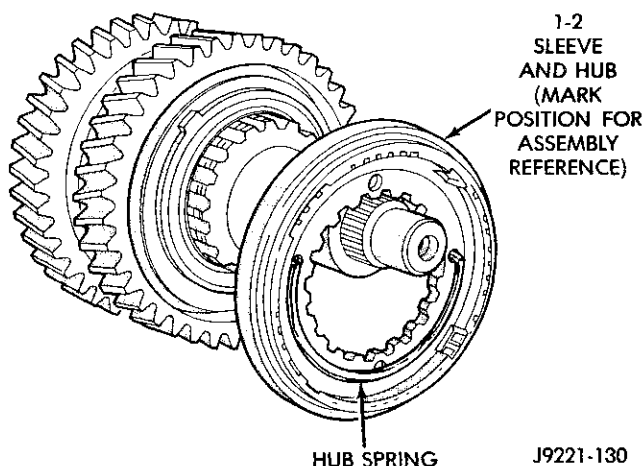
Removing 1-2 Synchro Sleeve And Hub
